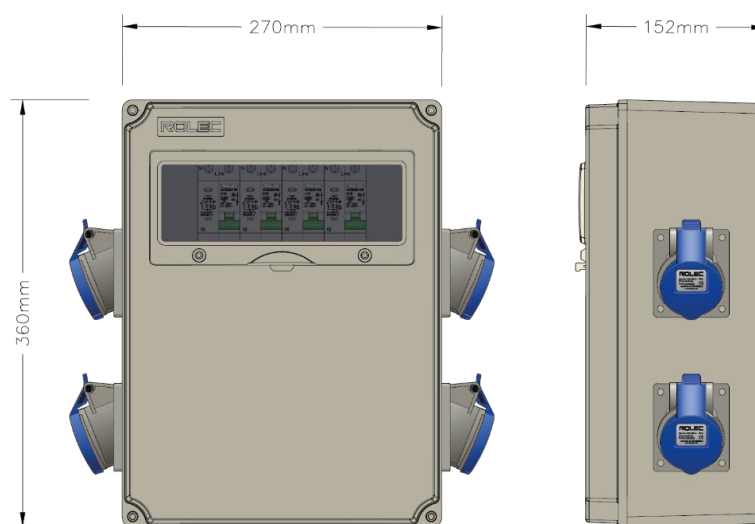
Large Non-Interlocked Enclosure with 4 x 16A Socket
